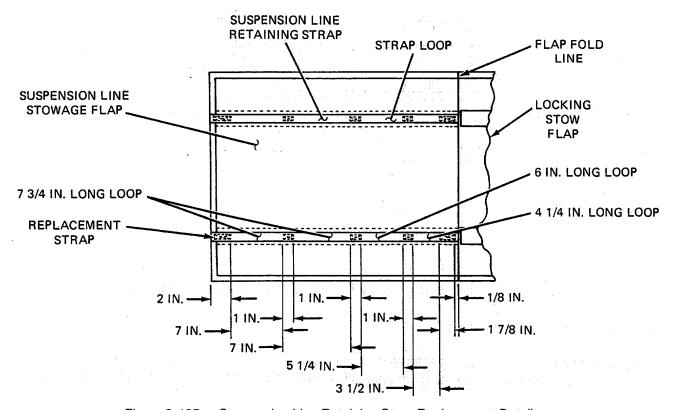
Suspension Line Retaining Strap Replacement Details.
